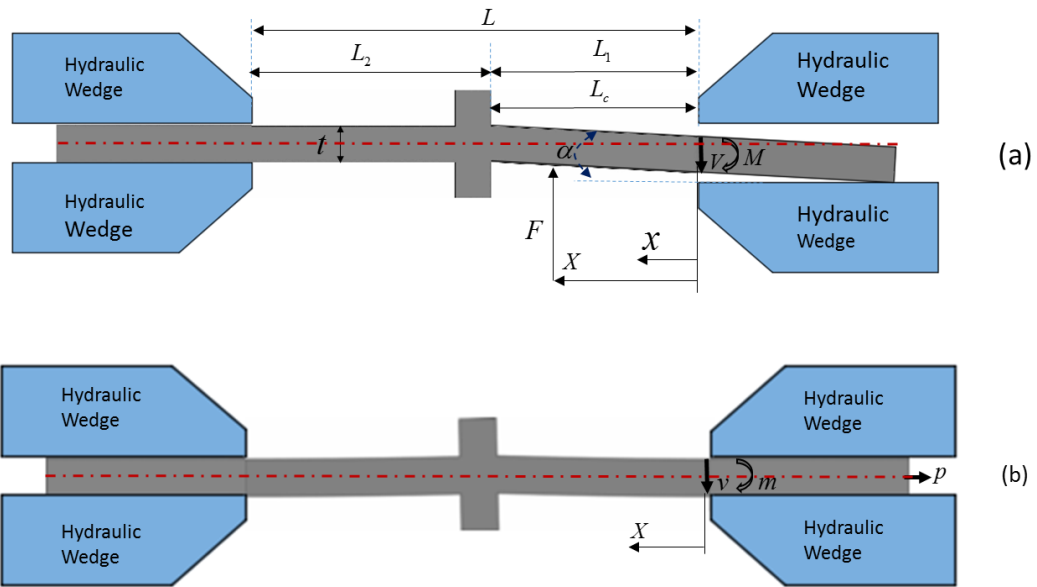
Cruciform joint with angular misalignment: (a) dimensions and shape before clamping; (b) deformed shape after clamping
